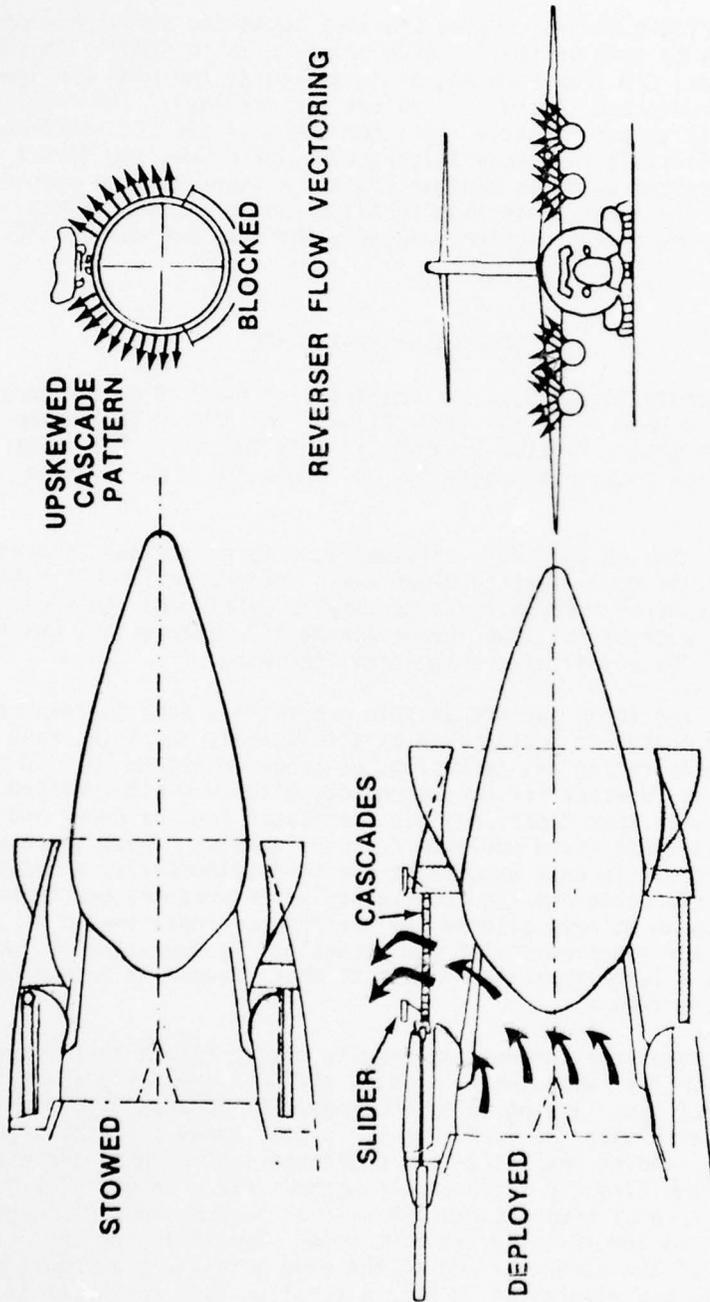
Thrust Reverser Daisy Exhaust Assembly
